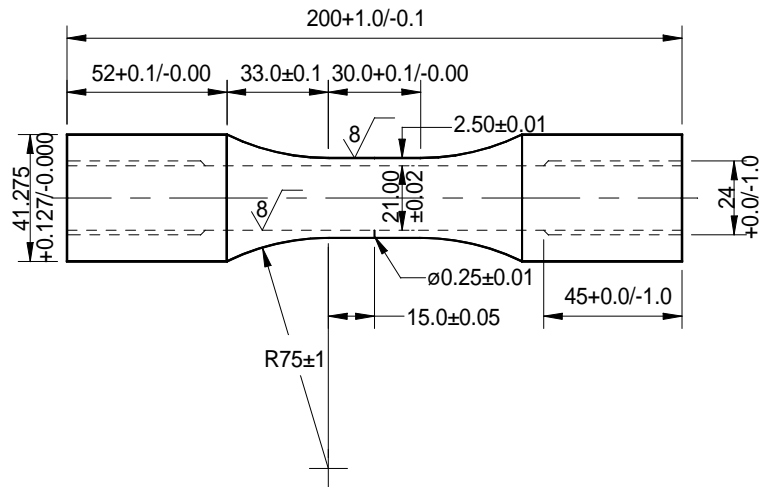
Tubular crack growth specimen. All dimensions in mm.
